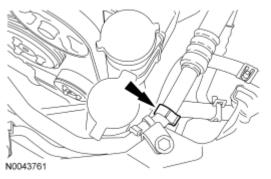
Locating Coolant Vent Hose Retaining Clip Courtesy of FORD MOTOR CO.
